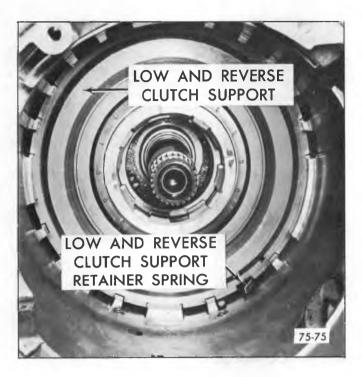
M-Installing Low and Reverse Clutch Support Assembly
